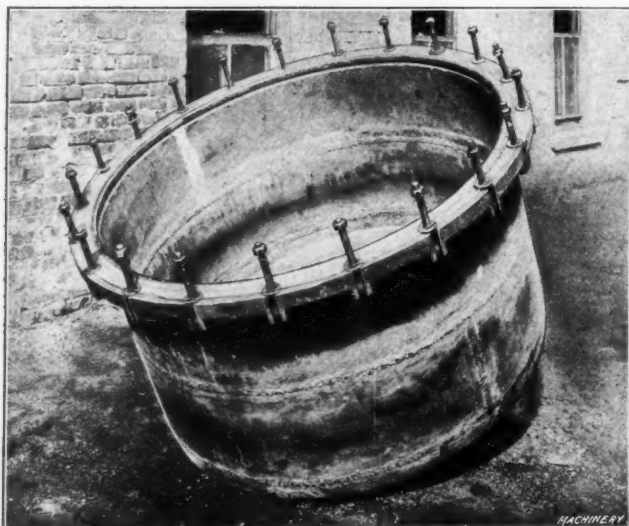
Example of Welding Copper. Kettle is 5 feet 6 inches in Diameter, 31 inches deep and used under Pressure. All Seams are welded on Both Sides
